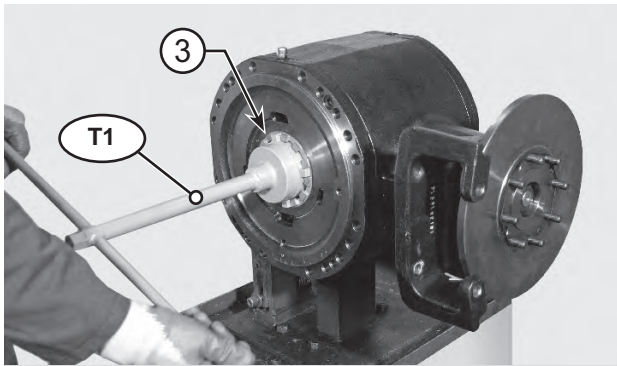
Only if ring nuts have been removed. Tighten the ring nut (3) on gear ring side until clearances between pinion and gear ring are zeroed. Then, loosen by about 1/4 turn.
